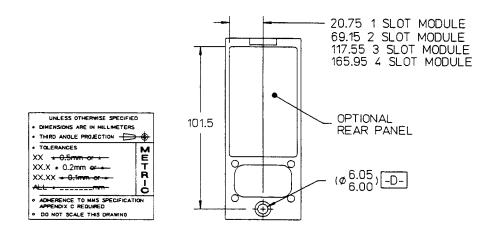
MODULE REAR DATUM REFERENCES
